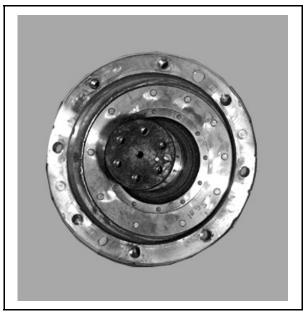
(MSSM0275AE) Identifing the Seal holder
